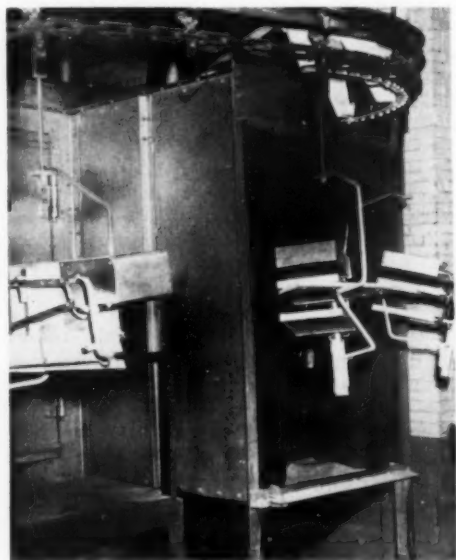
Welded Coil Units Are Conveyed Into Air Blast Room Where Weld Junctions Are Cleaned by Three Air Blast Units in Preparation for Zinc Metalizing. This "spot plate" eliminates the necessity of redipping the whole assembly
